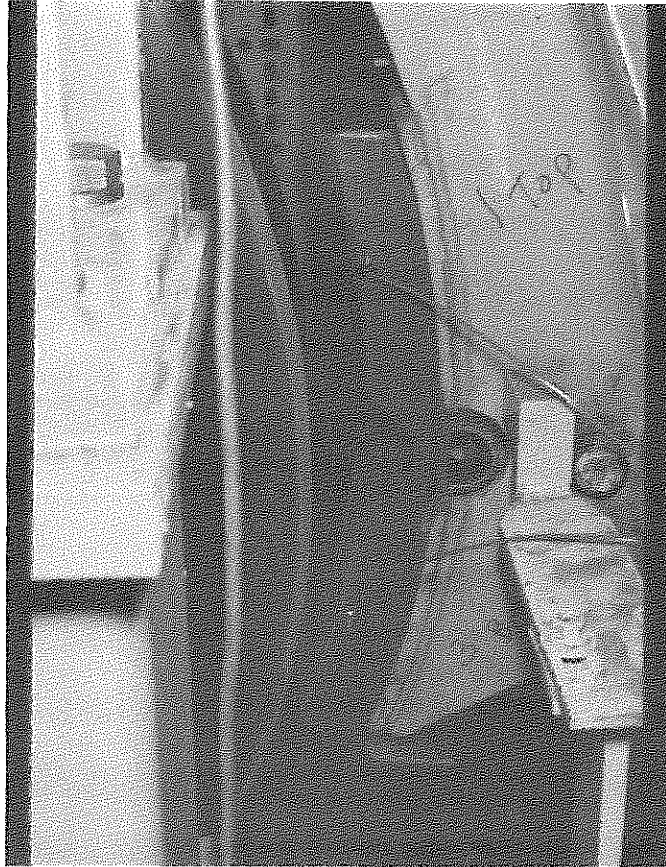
BRAKE SHOE WITH THERMOCOUPLES
